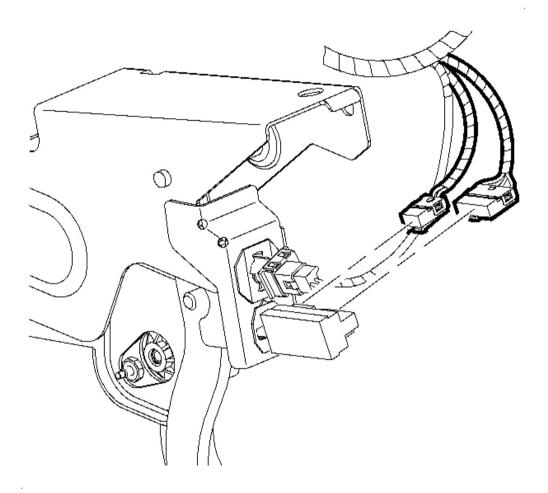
View Of Stop Lamp Switch Courtesy of GENERAL MOTORS CORP.
